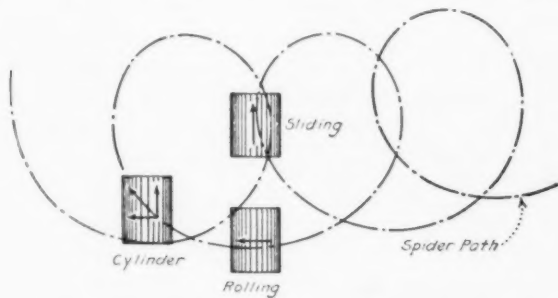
PATH OF ROLLERS ON LAPS. HOKE MACHINE
